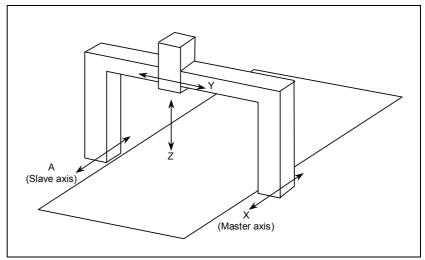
(a) Example of machine with X and A being synchronous axes
